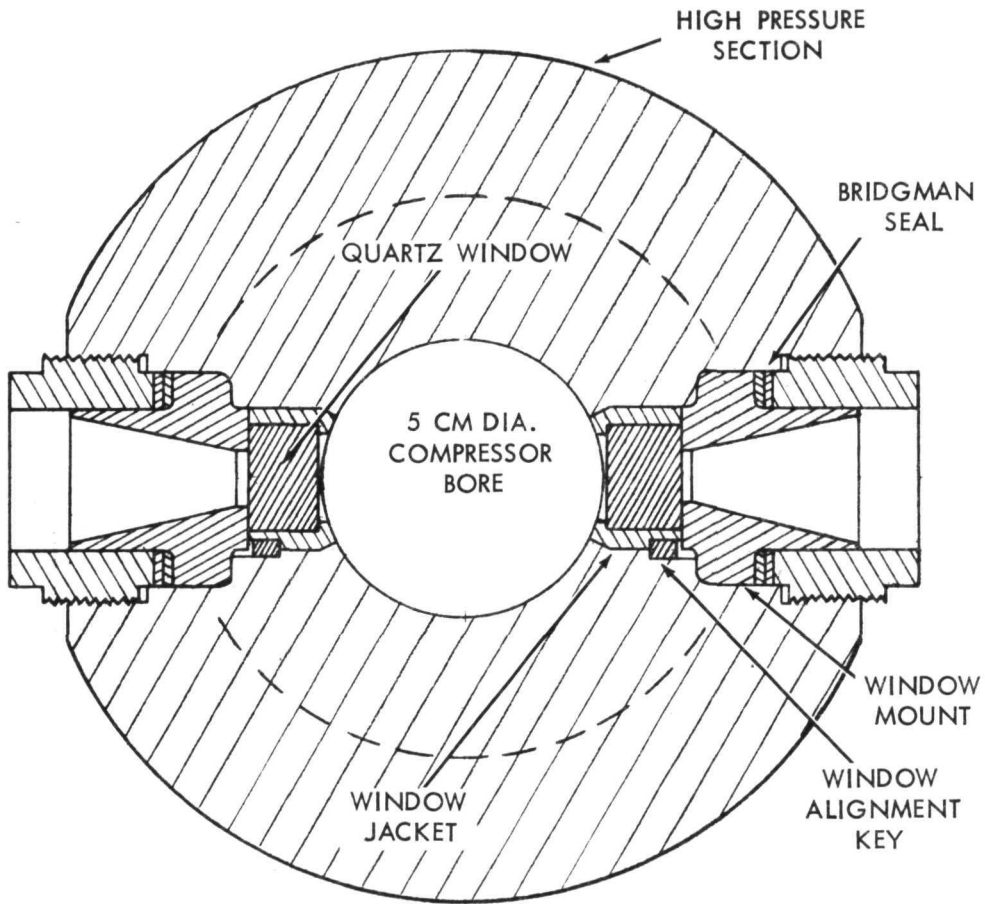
DETAILS OF SIDE WINDOW TEST SECTION
